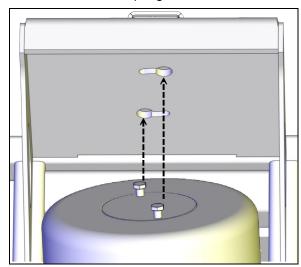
AIR SPRING UPPER MOUNTING PLATE
